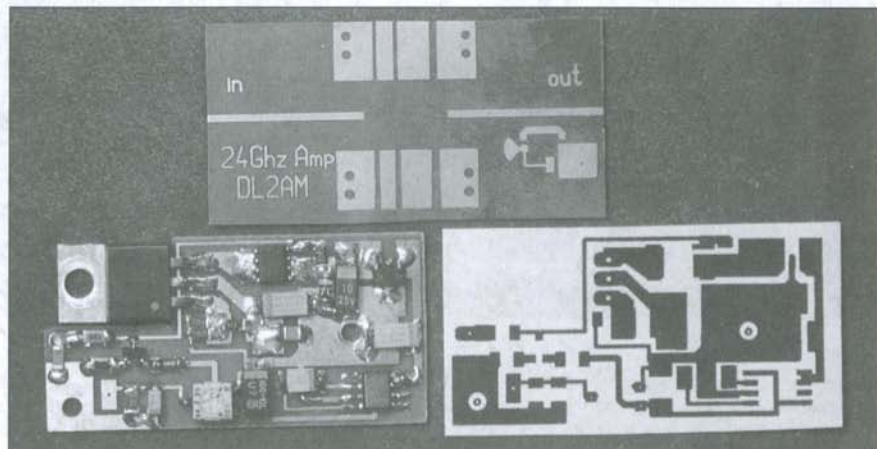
DCpart PCB and layout (bottom) and RF PCB (top)
